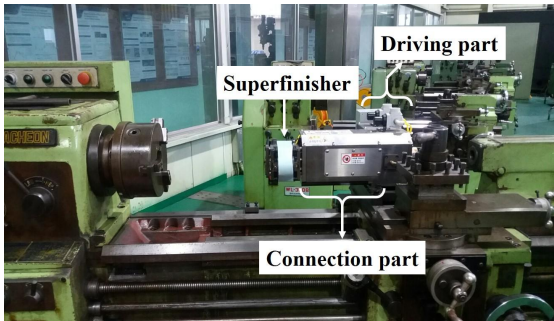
Manufactured inner surface superfinishing equipment using turning machine
